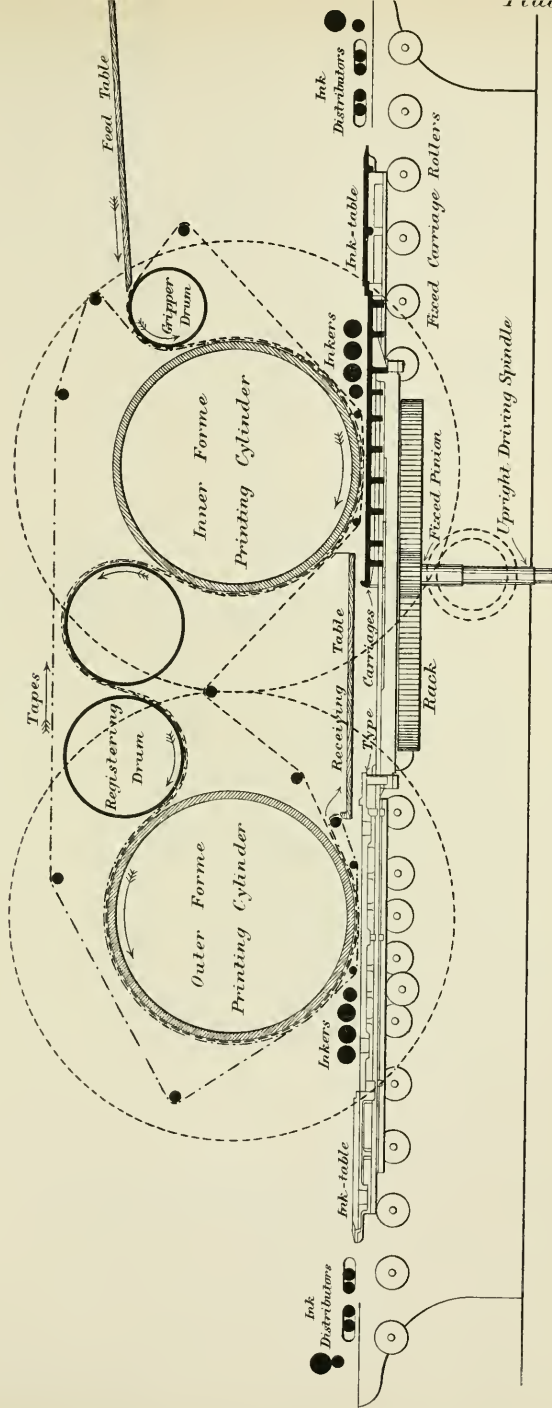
Single - Revolution "Perfection" Printing Machine.
